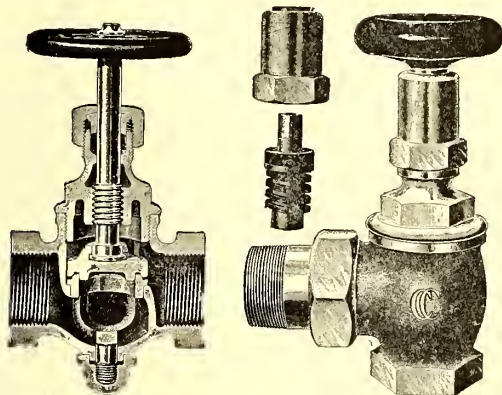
RENEWABLE SEAT OR DISC VALVE FIG. 2.—SELF-PACKING VALVE
